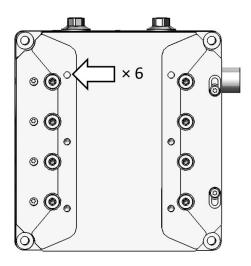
M3 mounting holes with a depth of 6 mm for fixing the objective holder
